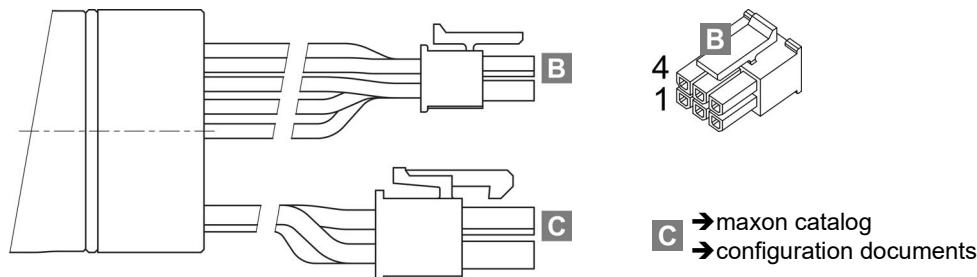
ENX 13 | 16 | 22 COMM – Cable Plugs
